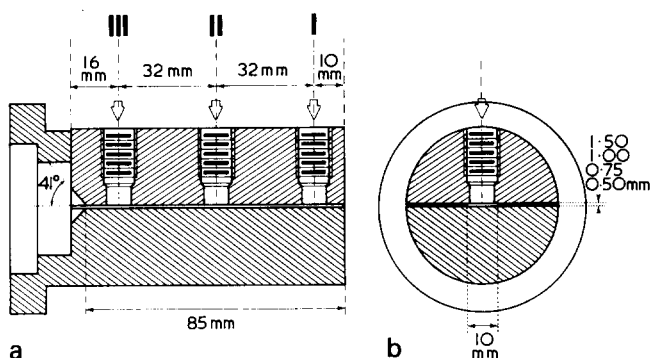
Slit dies dimensions and locations of pressure holes. (a) Longitudinal section; (b) transverse section
